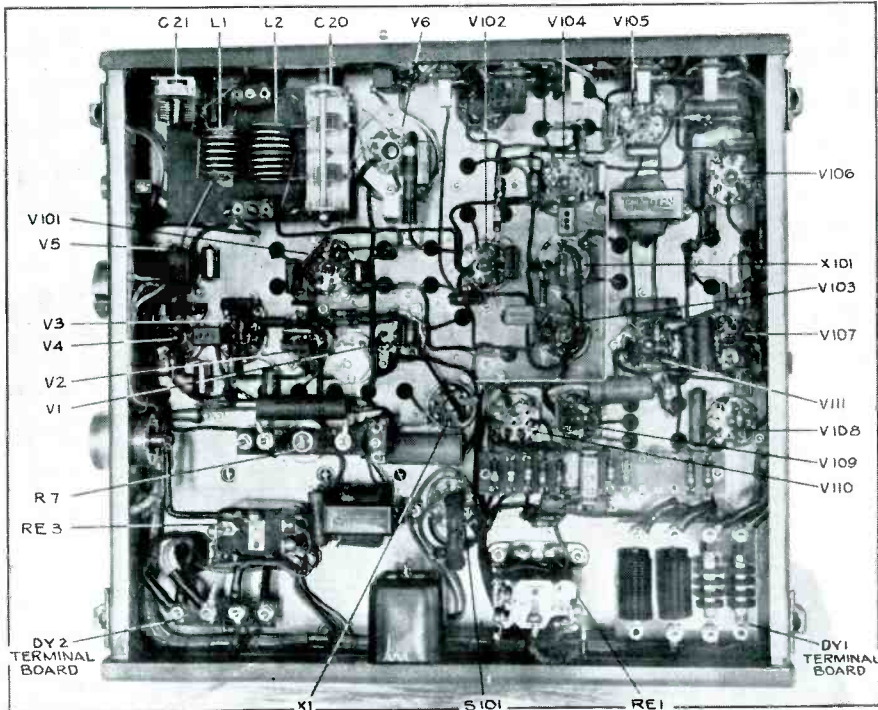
UNDER SIDE OF THE CHASSIS. CONSTRUCTION IS REMARKABLY SIMPLE, CONSIDERING THAT THIS UNIT CARRIES THE COMPLETE TRANSMITTER, RECEIVER, AND POWER SUPPLY
